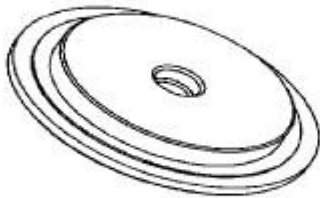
CAMSHAFT TIMING TOOL - VM.9991
